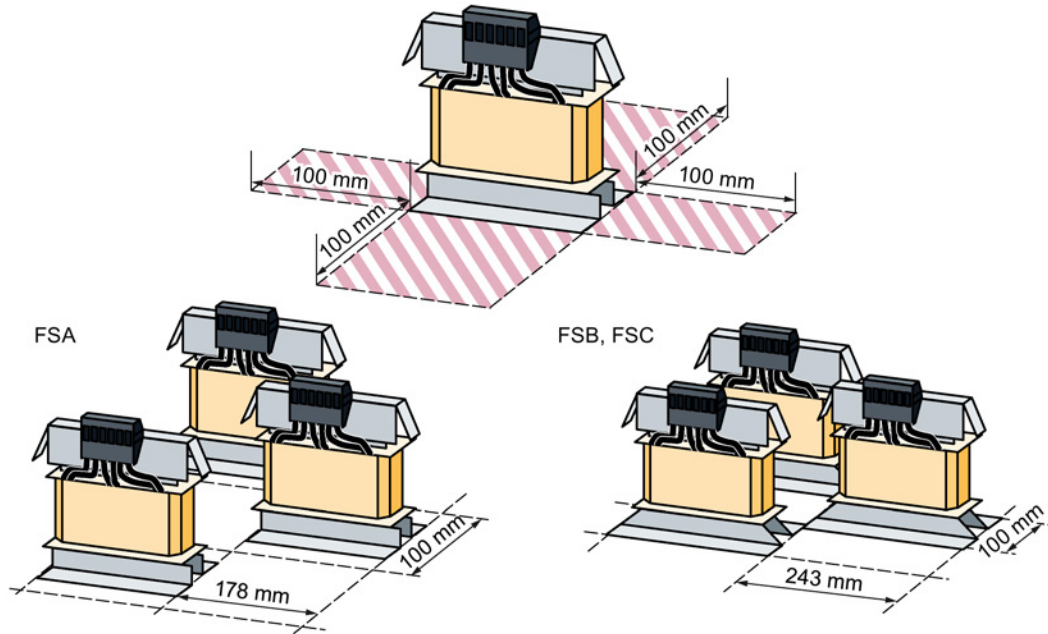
Minimum clearances of the output reactor to other devices, space-saving mounting examples
